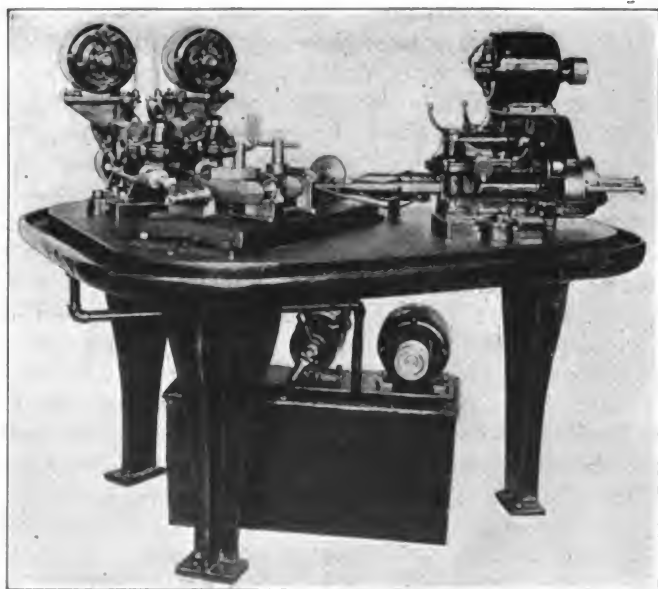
Assembled Harrington No. 130 crankshaft oil hole drill
